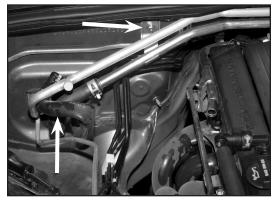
Figure C - Wrap the end of the flexible heater hose behind the aluminum tube to hold it clear of the area above the exhaust manifold. Remove the nut that secures the aluminum tube bracket to the firewall.
